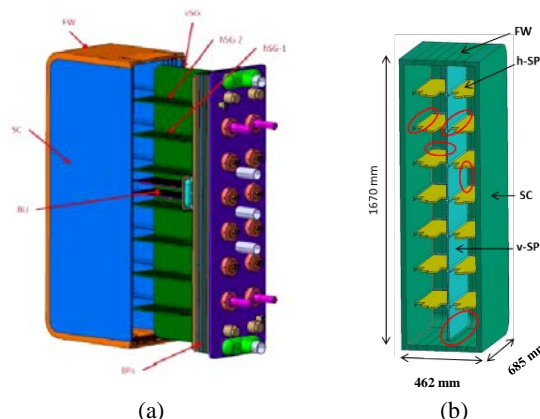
Exploded view of the HCLL TBM steel structure [2]
